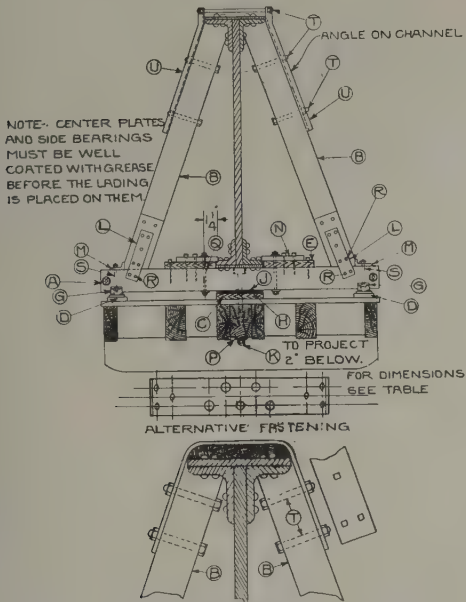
LOADING OF GIRDERS IN VERTICAL POSITION ON TWO OR MORE CARS.
